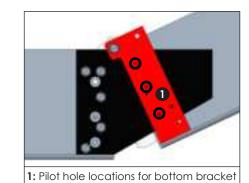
Jig Placement and Pilot Hole Locations (Bottom)
